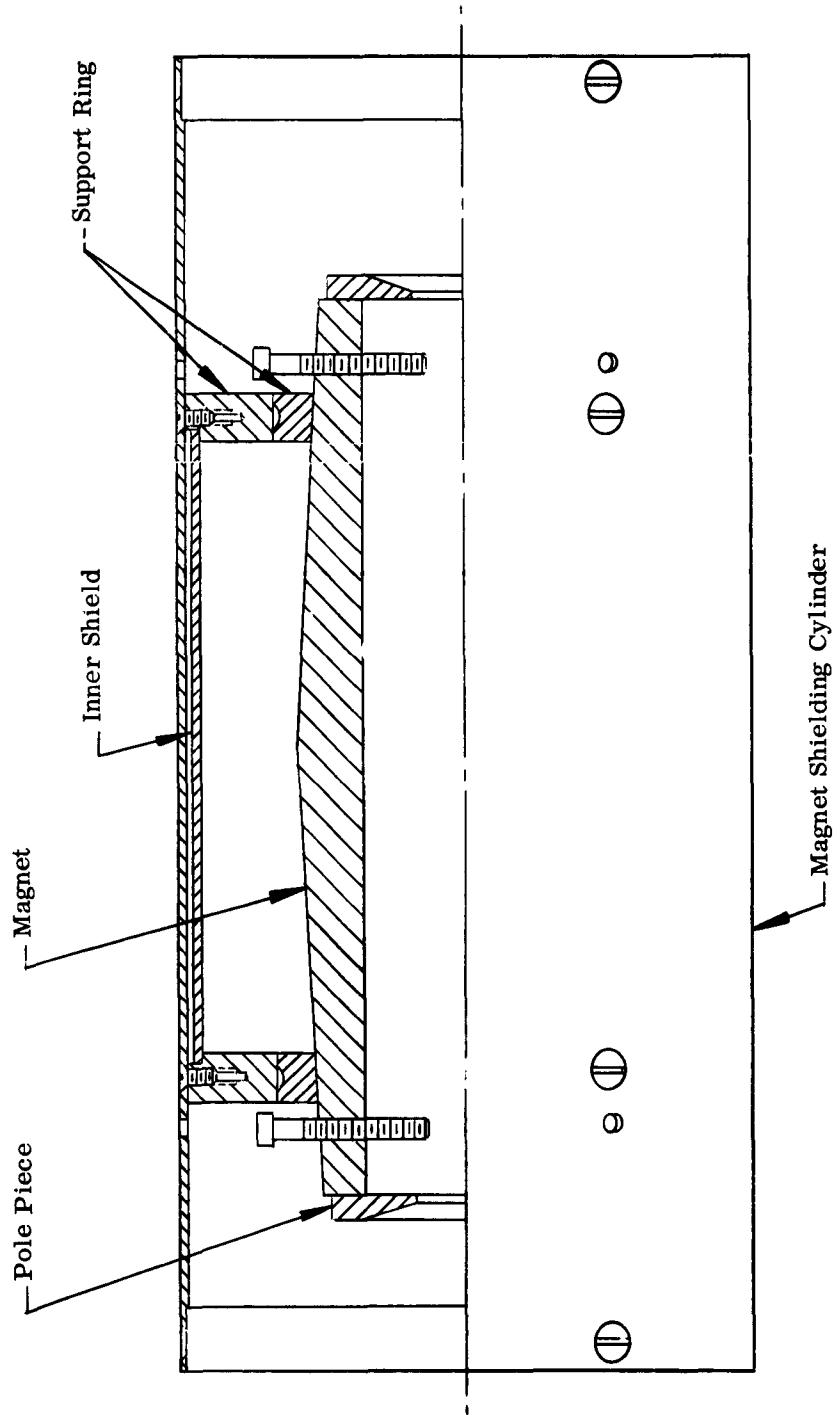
Sketch of a method for mounting and shielding a straight-field Alnico 5 magnet.
